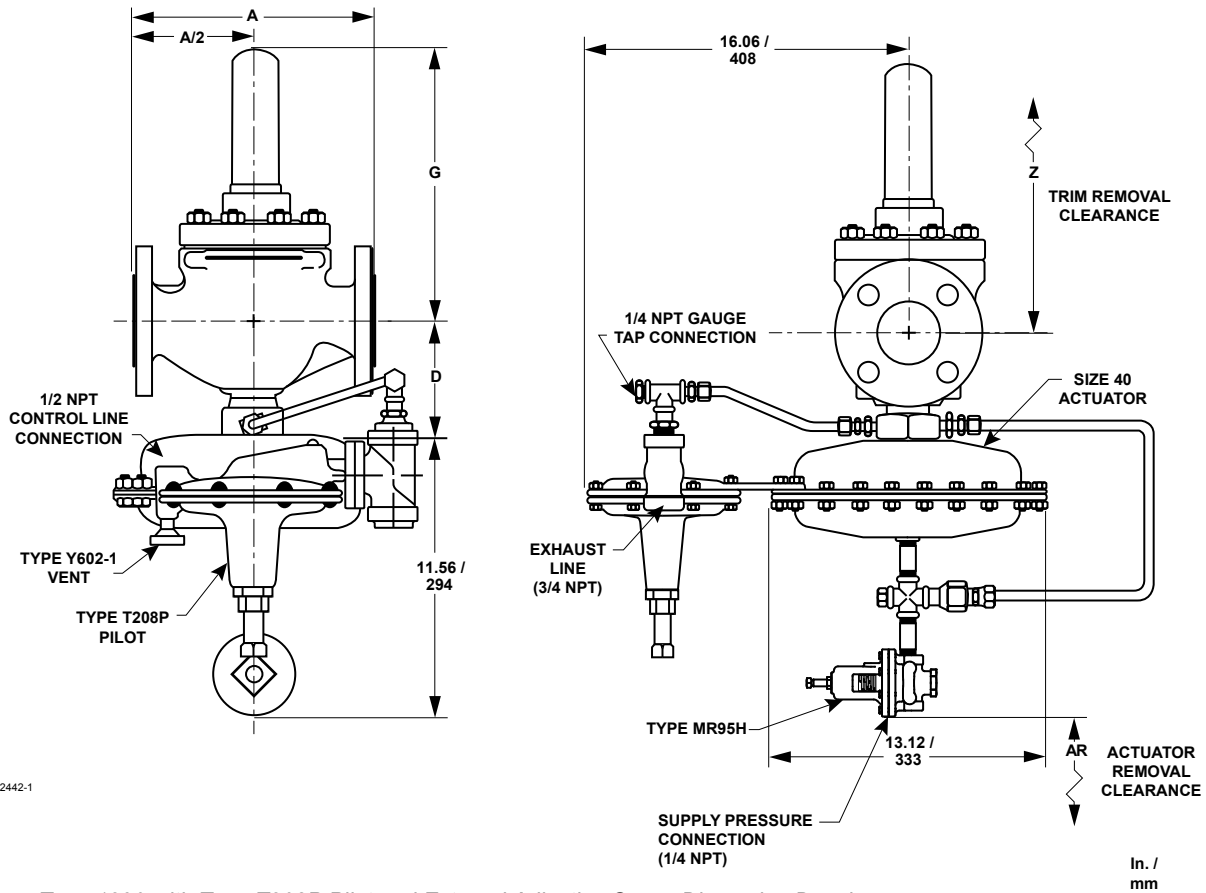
Type 1290 with Type T208P Pilot and External Adjusting Screw Dimension Drawing
